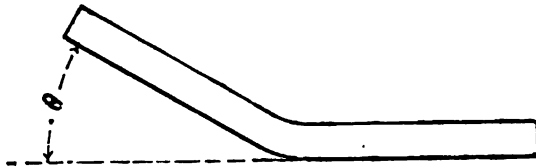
ADMIRALTY COLD BENDING TEST FOR WROUGHT IRON.
